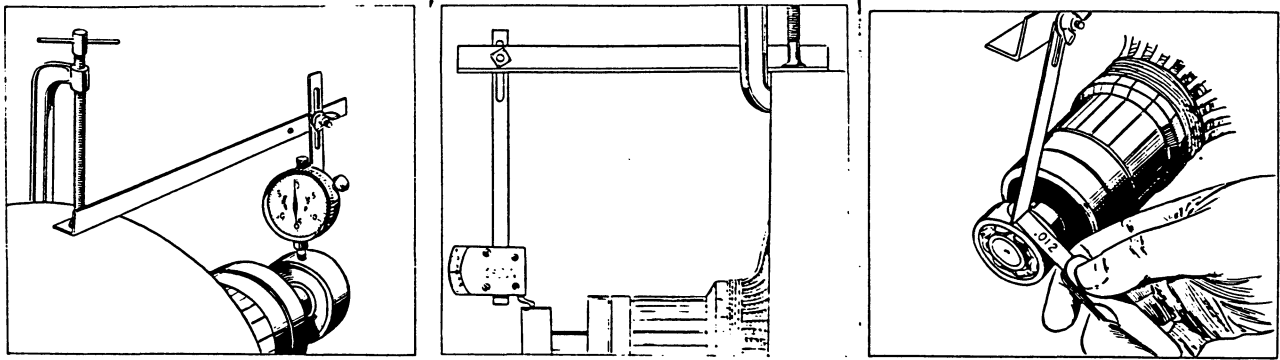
TYPICAL METHODS OF CHECKING RUNOUT.
